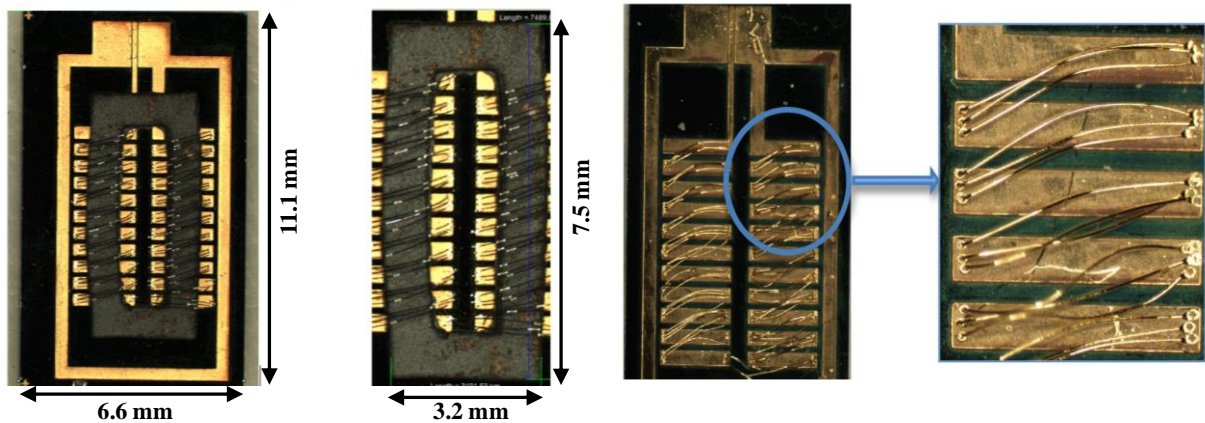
Top view of magnetic core test inductor and air-core test inductor
